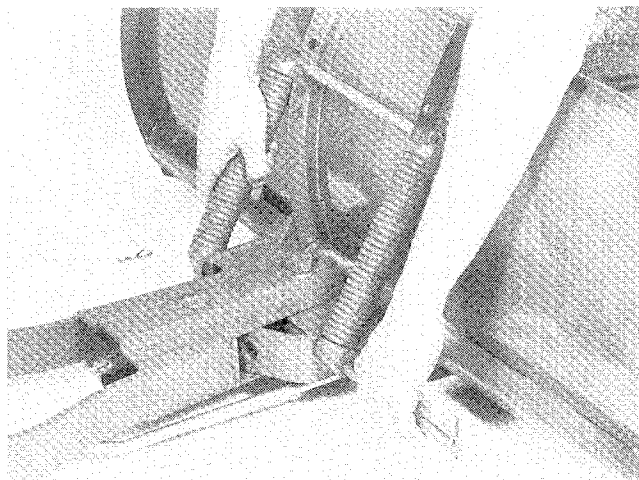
Attach Trip Springs to Sector and Channel Assembly
